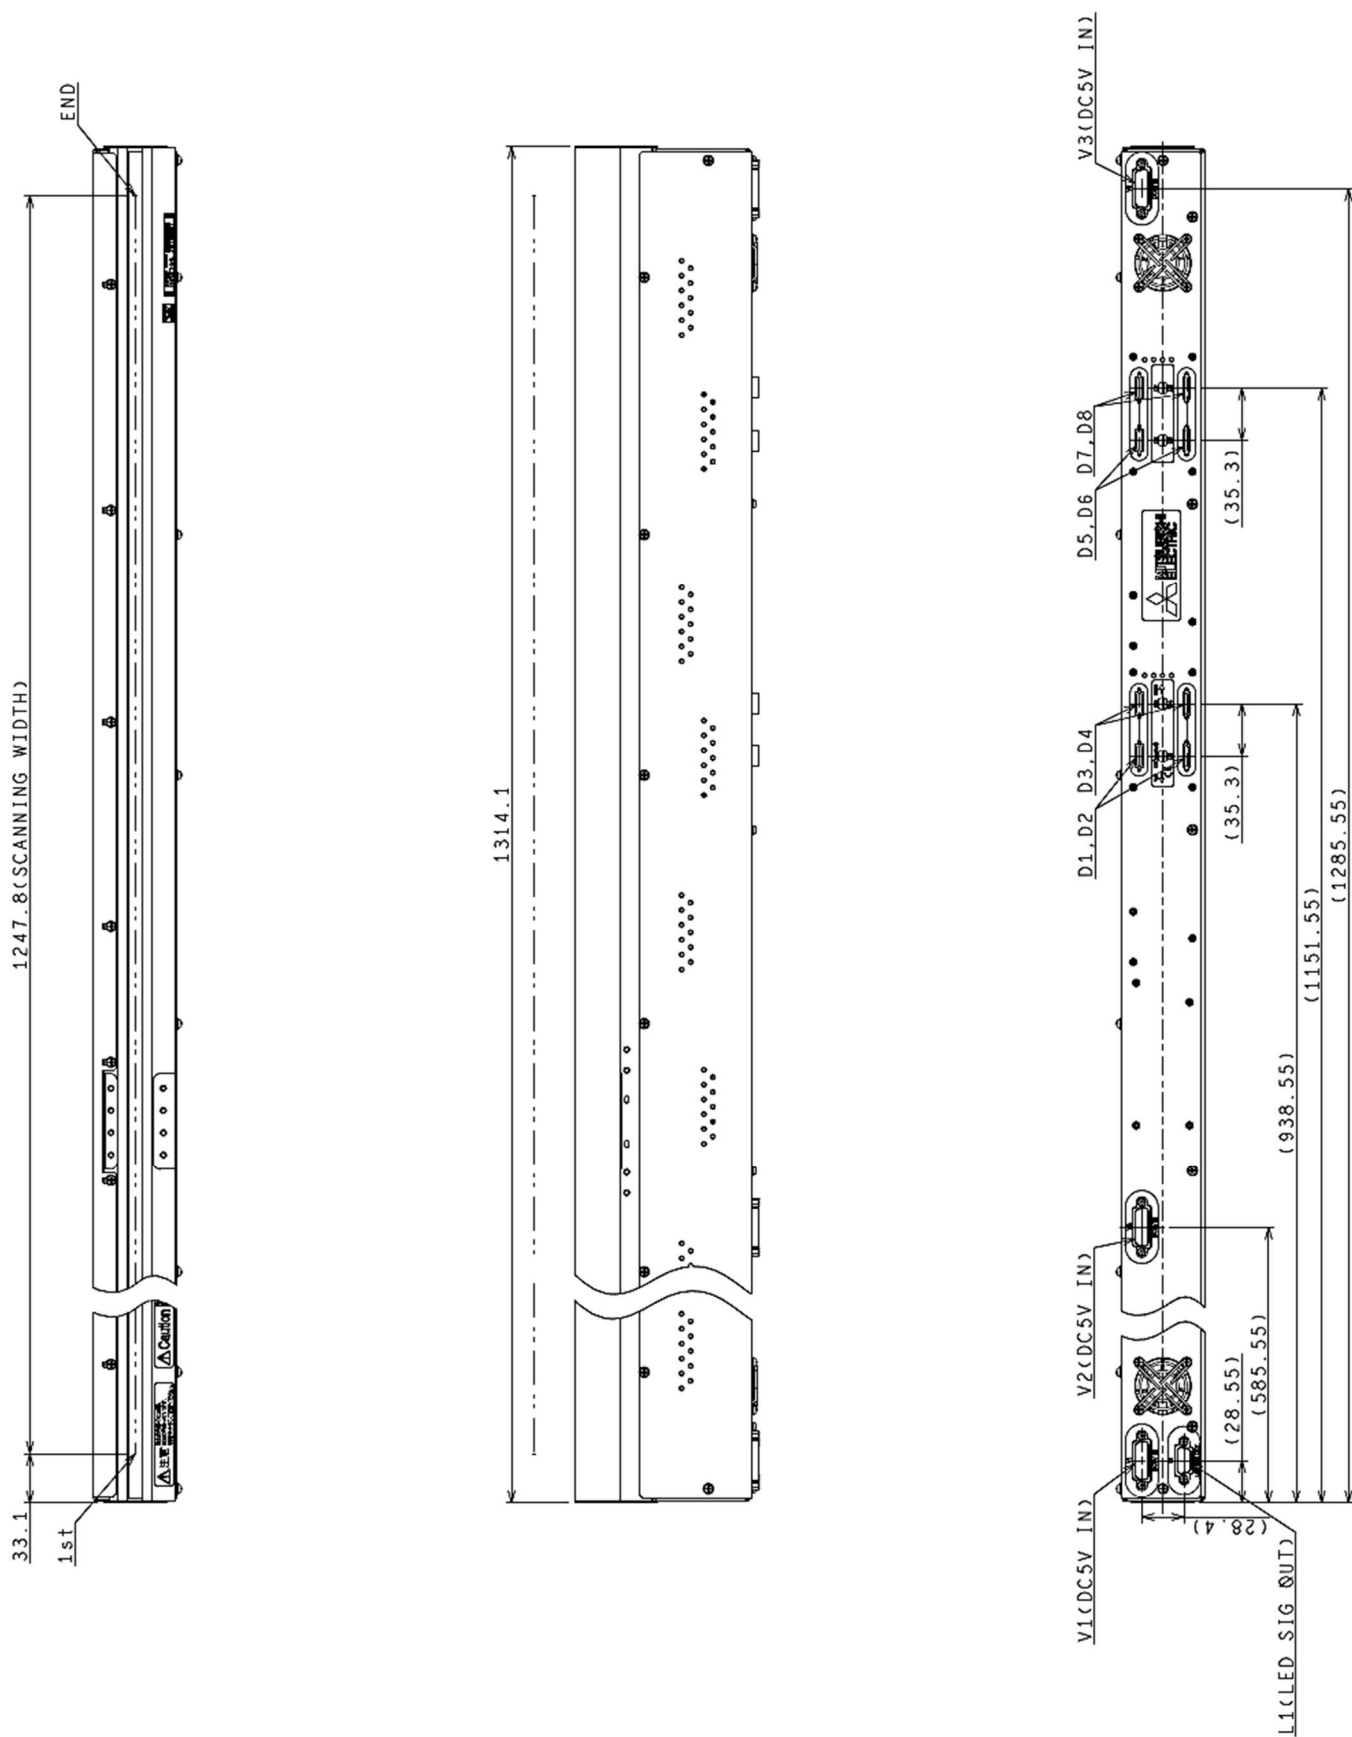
KD6R1247DXL-NL Outline drawing (at 24°C)
